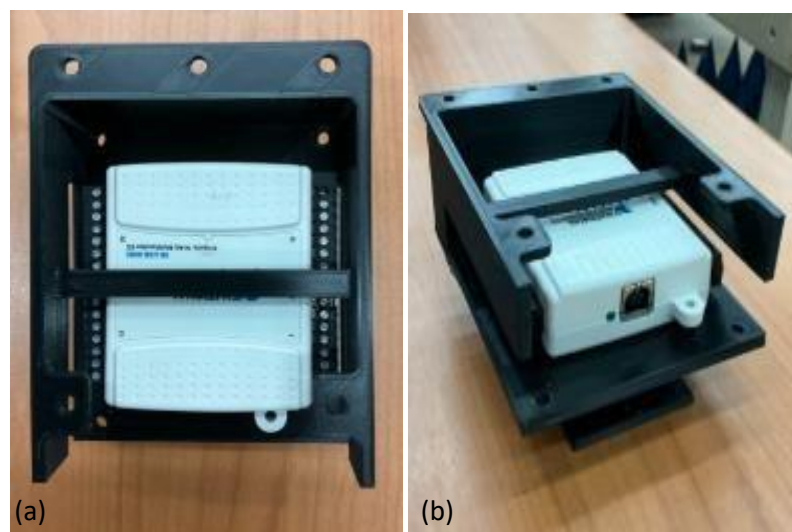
3D printed designed, DAQU placed to check whether design measurements match the specifications.
